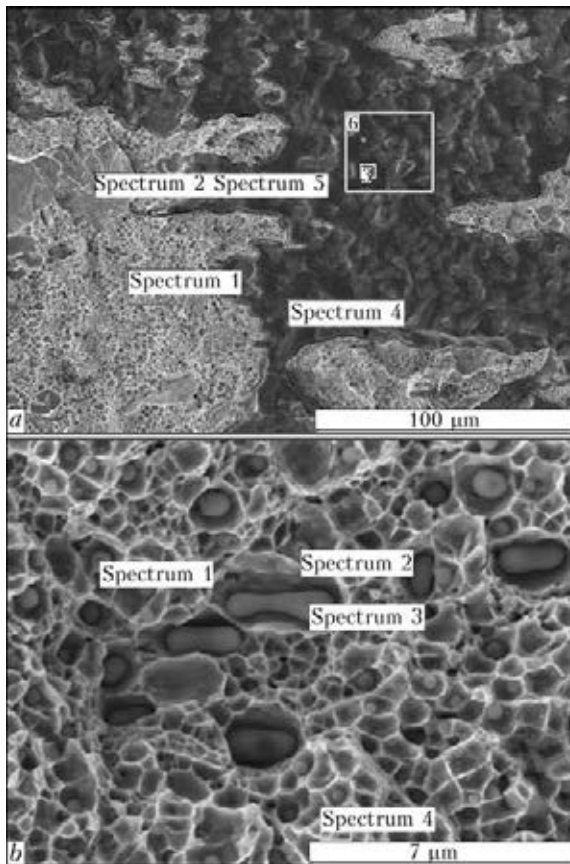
Iron-manganese silicates on the fracture surface of rail welded joint
